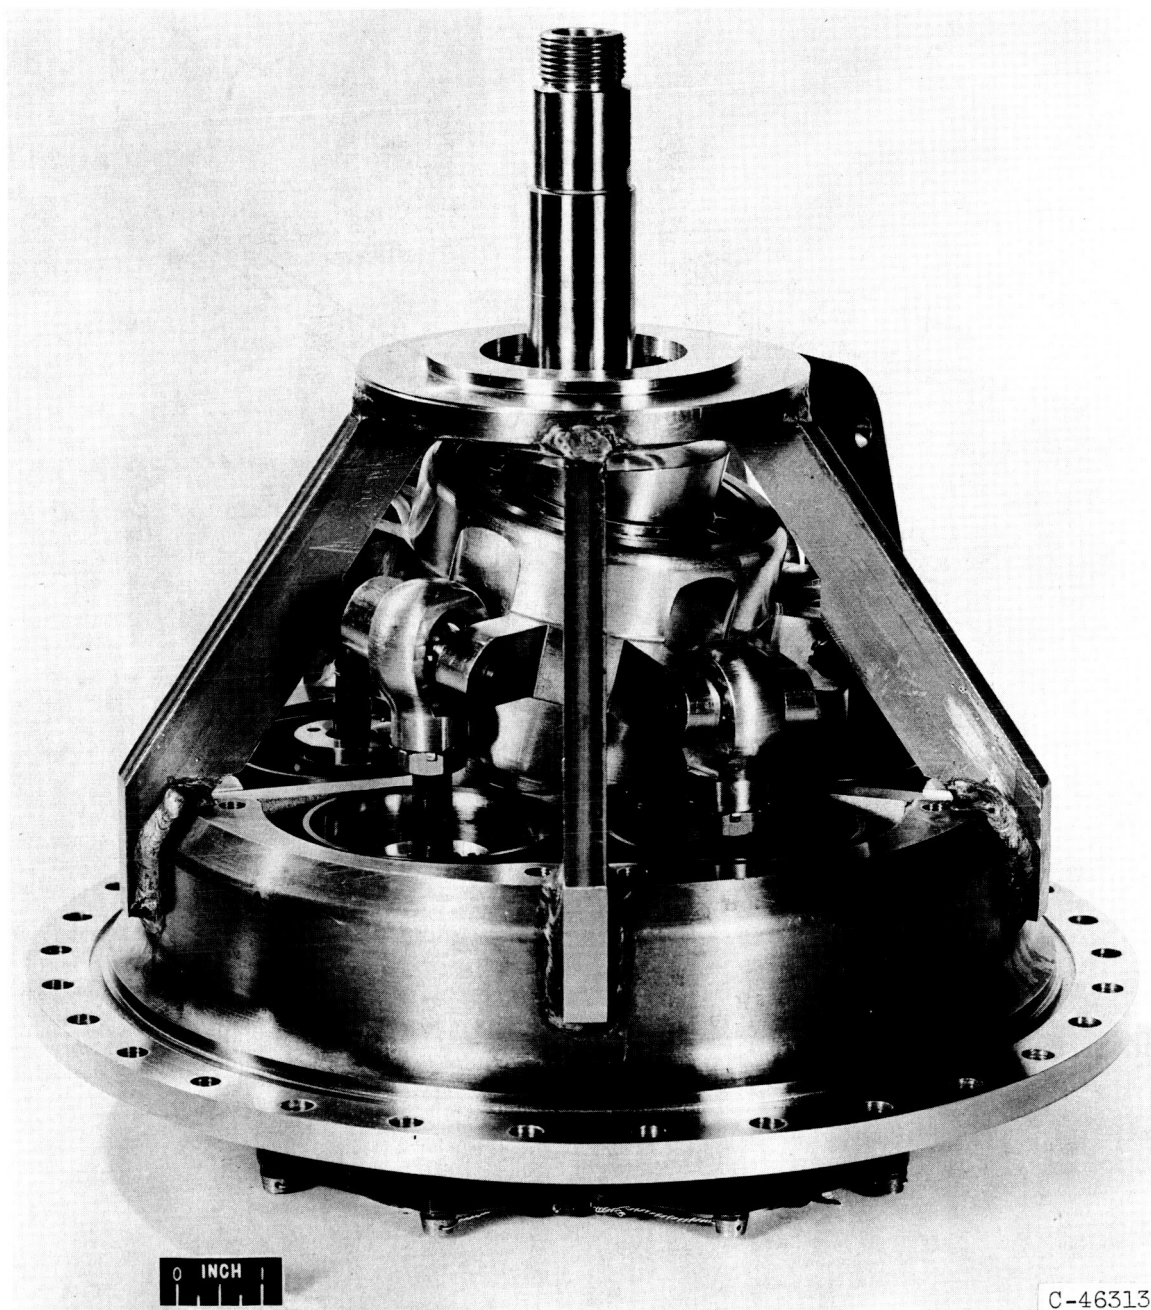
Pump assembly with discharge cover removed as constructed for submerged operation in bottom of tank.
